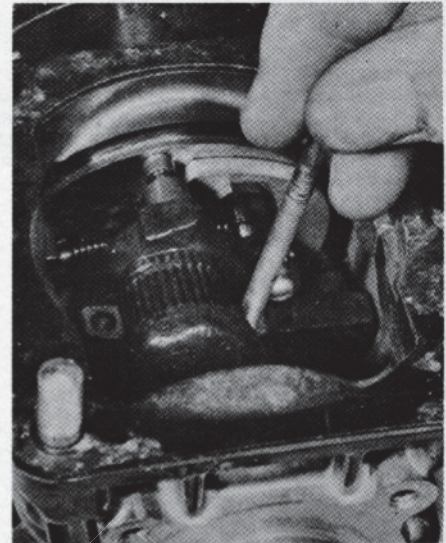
A 10-32 threaded rod or headless screw is used as tool to help in assembling connecting rod to cap. Stick the 31 loose needle rollers to crankpin with beeswax or heavy grease, then carefully position cap so that when assembled, pinned side of piston is towards intake side (upper side) of engine.
